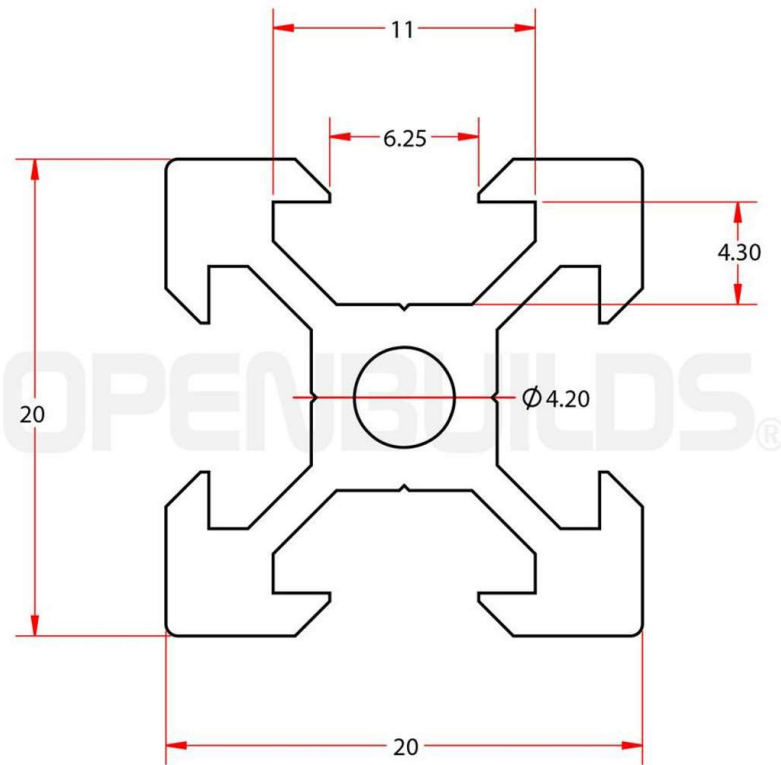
Manufacturing Drawing of part SS#1-P#3– T Track Rails
